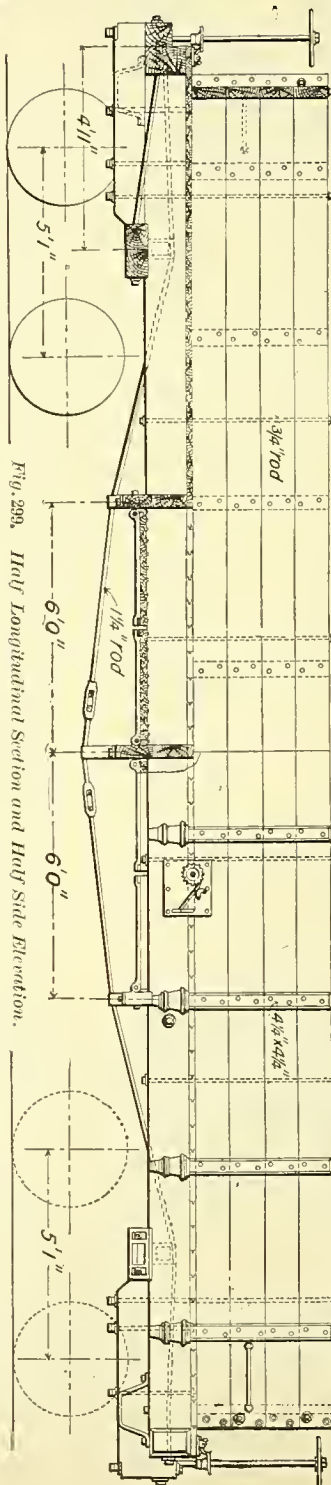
Half Longitudinal Section and Half Side Elevation.
